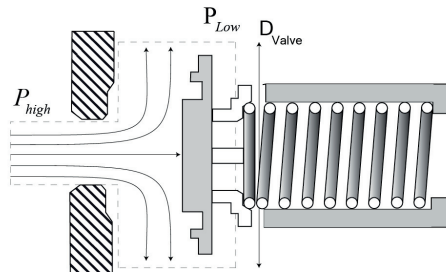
schematic of the preloaded spring-backed check valve components.
